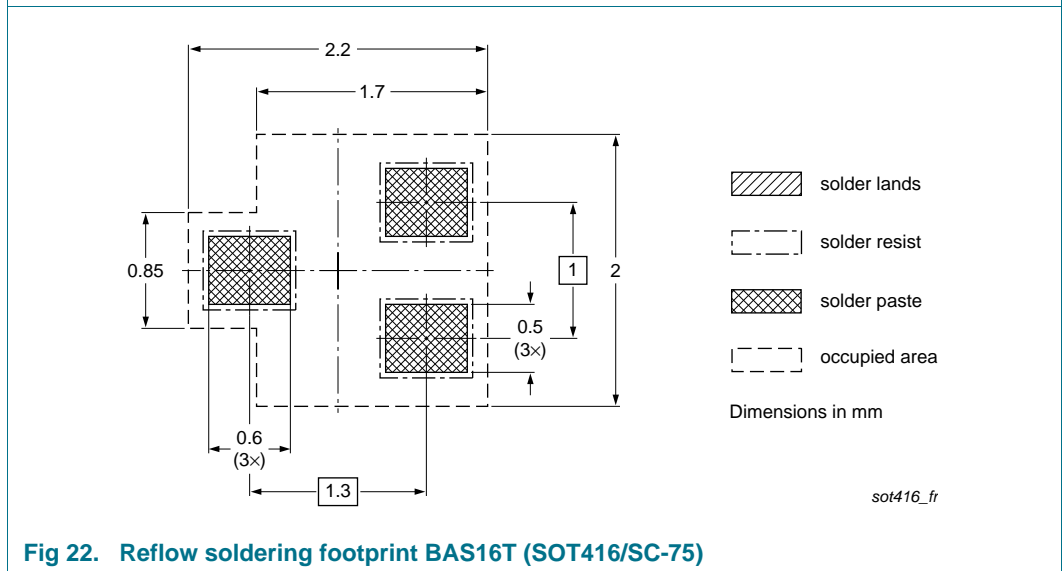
Reflow soldering footprint BAS16T (SOT416/SC-75)
